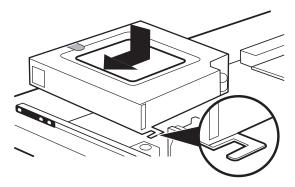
Installing the DVD Assembly Into the Chassis
